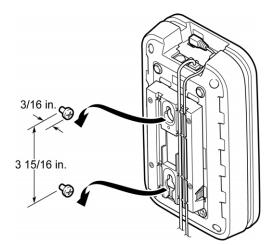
Attaching the Wall Mount Unit to the Wall
